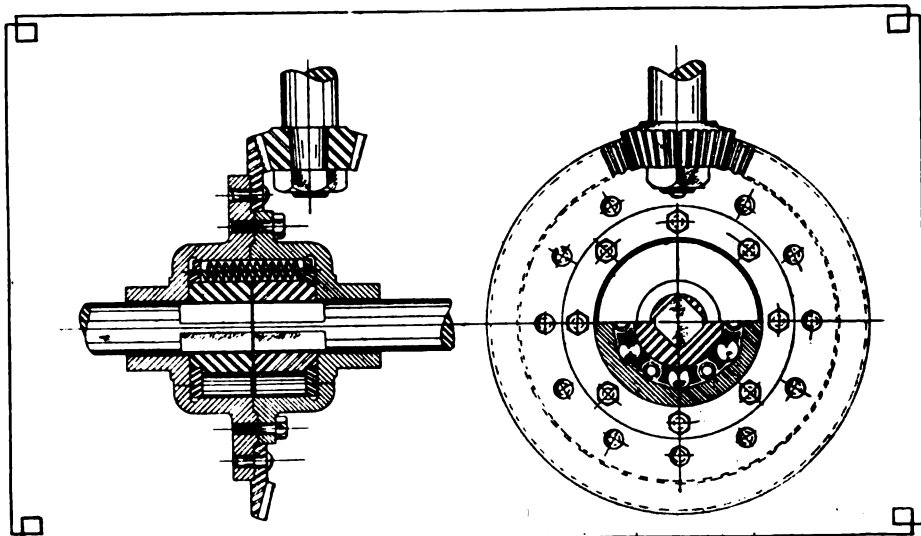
Cam and Roller Type of Free-Wheel Mechanism.
